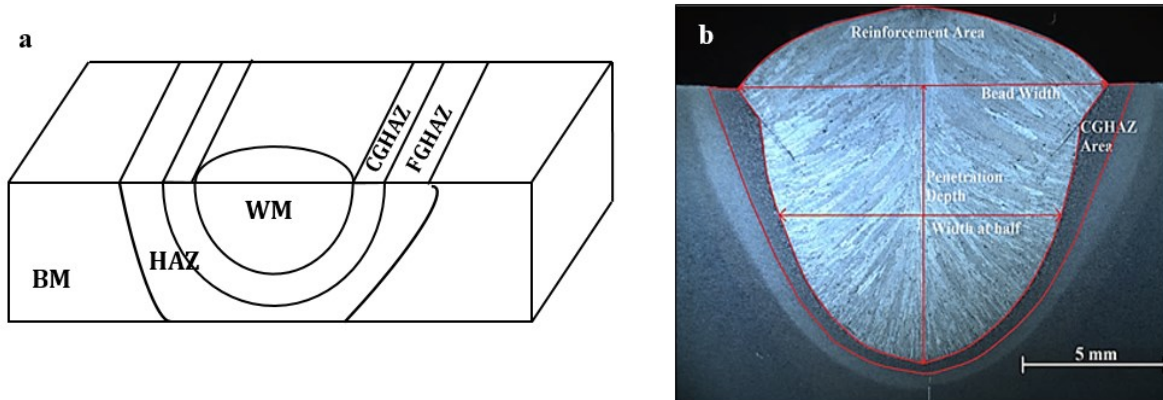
(a) Schematic of the welded steel indicating different weld zones. (b) Optical macrograph of X70 microalloyed steel welded by CWTSAW, indicating the geometry characteristics.
